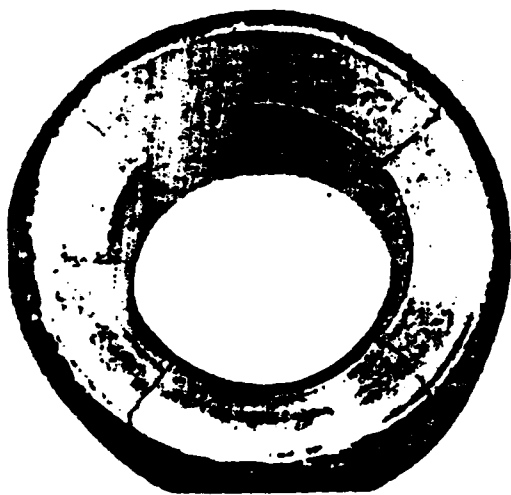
Matrix/die made of steel 3X787 after extrusion/pressing.
